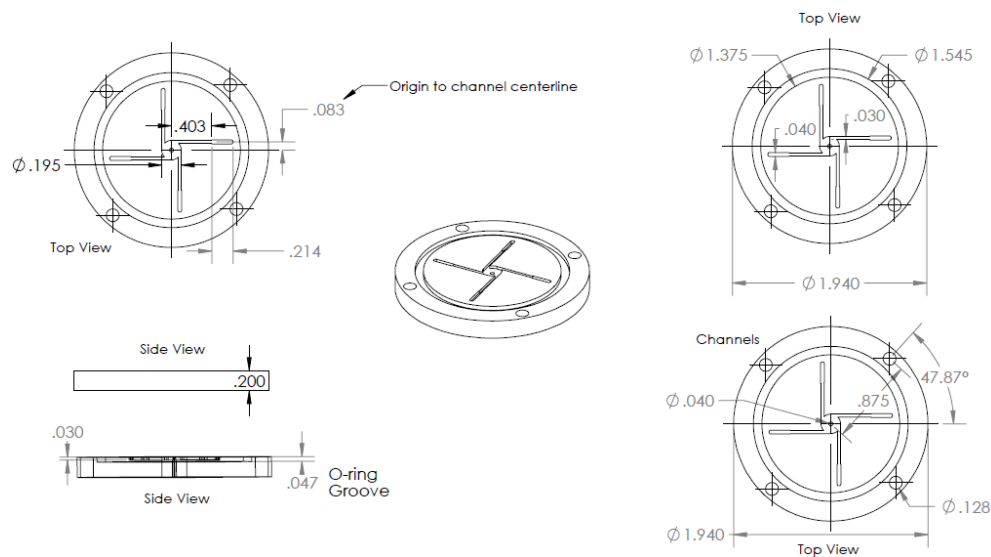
Engineering drawing for the center disk of the μ MIVM mixer showing the mixing geometry. Dimensions in inches.
